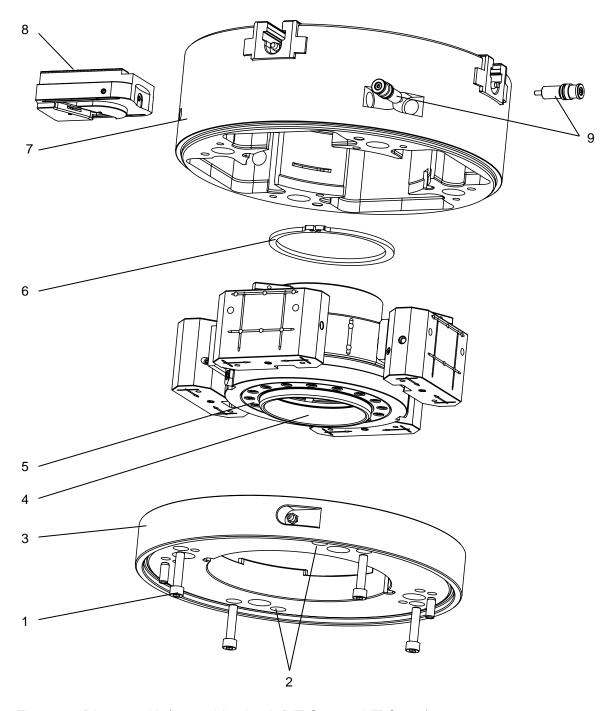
Disassemble/assemble chuck (VT-S 013 – VT-S 080)
